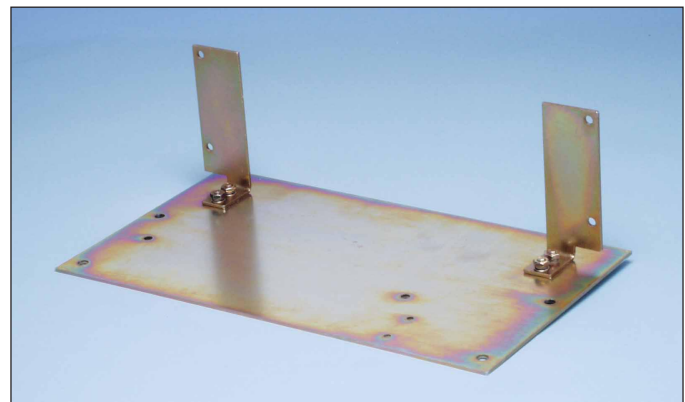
Aux. CT Mounting Brackets Attached to the Trip Unit Mounting Platform
